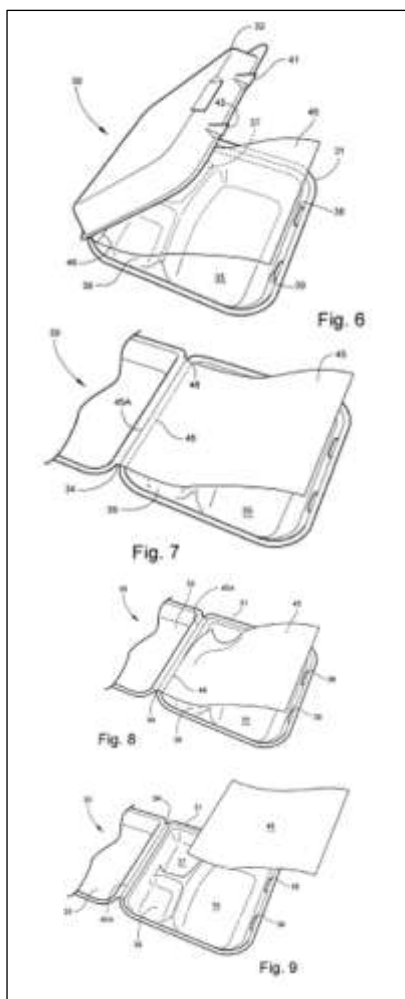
is a fragmentary view of the food container with the wax paper sheet removed from the compartment tray.
